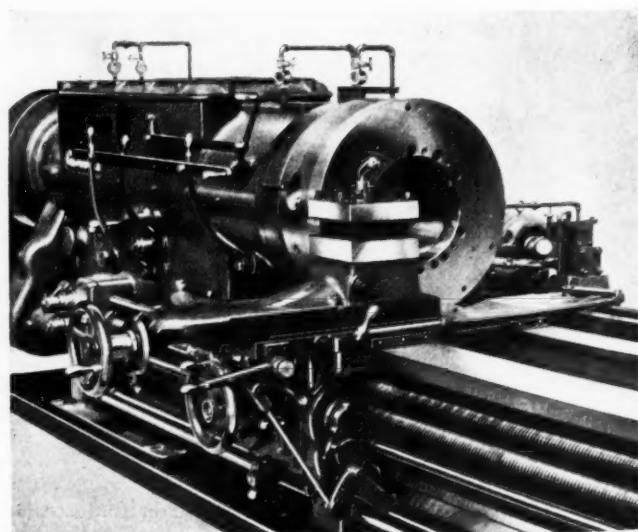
View Showing Carriage and Chuck at Machining End of Heavy-duty Turret Lathe Equipped for Threading Oil-well Pipes Forty Feet in Length by About One Foot in Diameter
